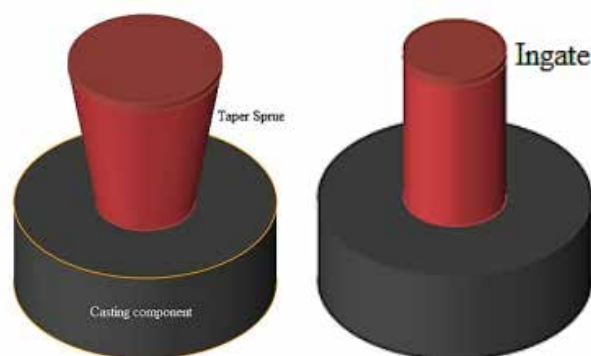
3-D casting design model for taper and linear sprue of a scheme I
